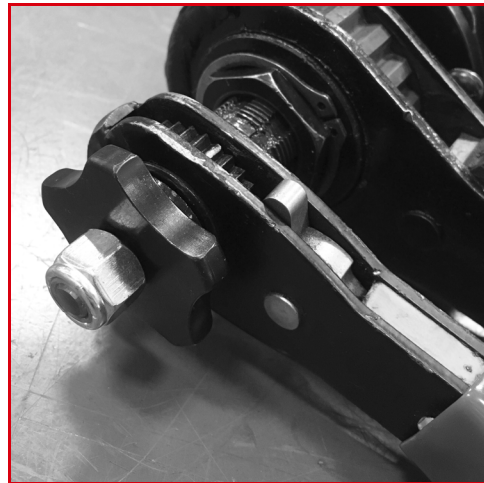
LOCKING ROD WRENCH WITH SPEED WHEEL
